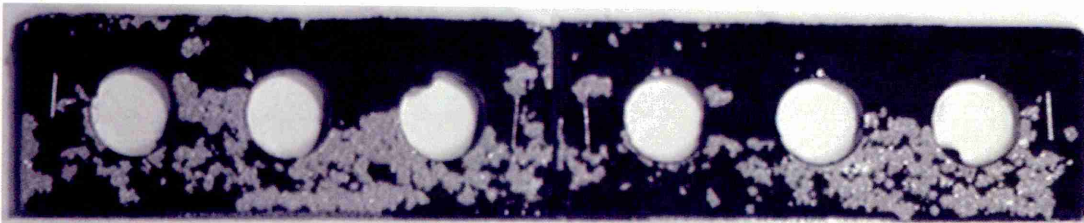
Alumina grit blast + primer fracture surface after environmental exposure
